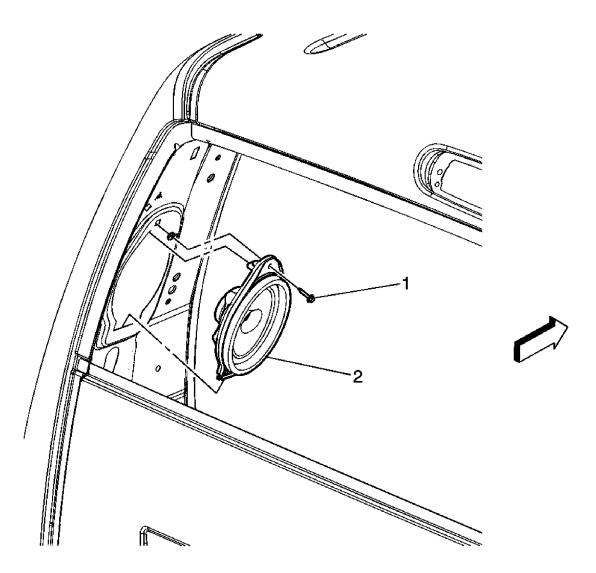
Rear Pillar Speaker Replacement Courtesy of GENERAL MOTORS CORP.
